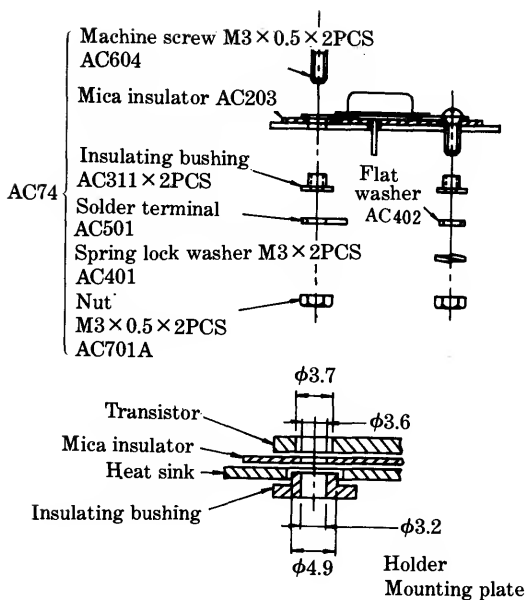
Mounting transistor TO-66 (2-13A1A) on a heat sink
